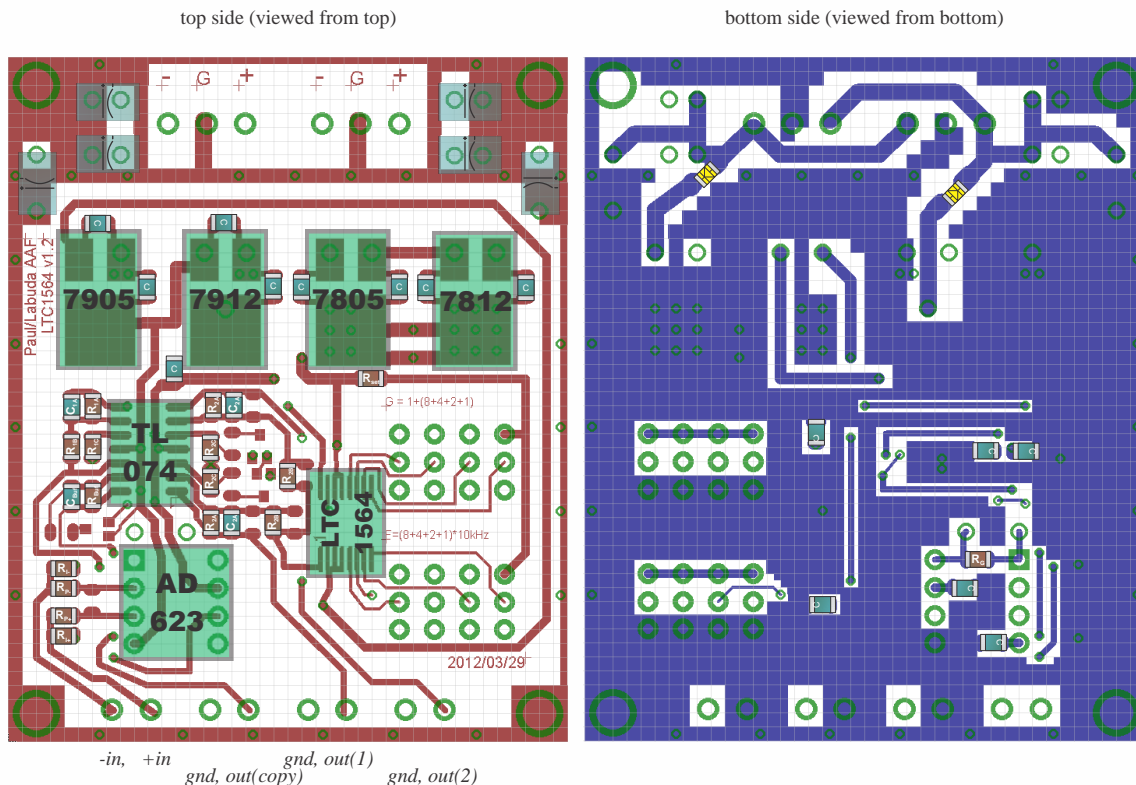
Component placement on printed circuit board. See text for full description of assembly.
